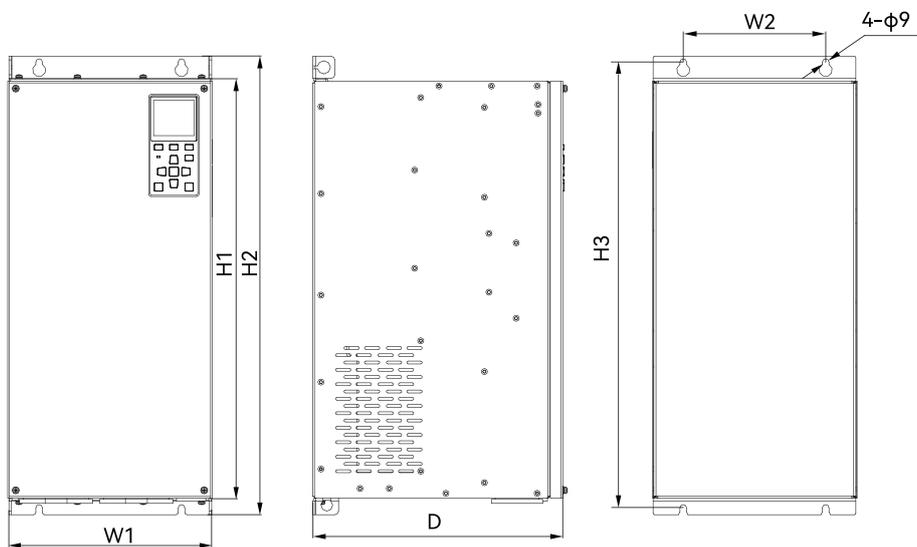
Dimensional drawing of E630 series products (90~110kW)
